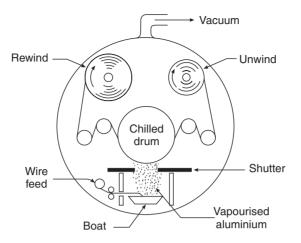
Metallising process. (Courtesy of The Packaging Society.)
